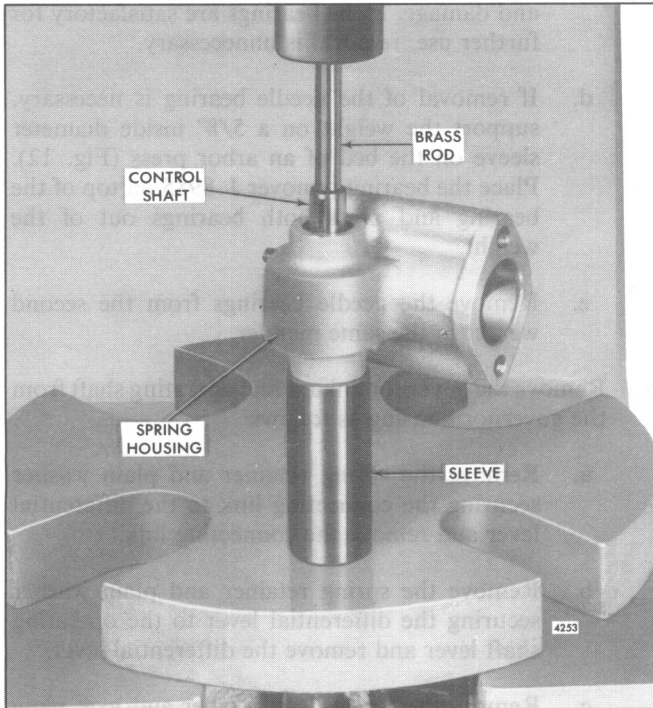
Removing Speed Control Shaft, Bearing and Cup Plug from Variable Speed Spring Housing
